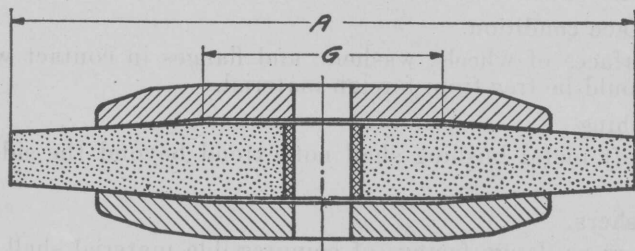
Driving flange secured to spindle. See rule 8.7
